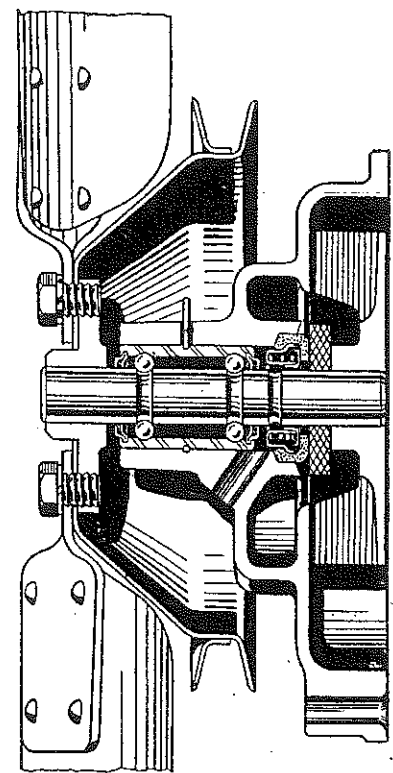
Water pump on 223 engine. Typical of 230 engine
